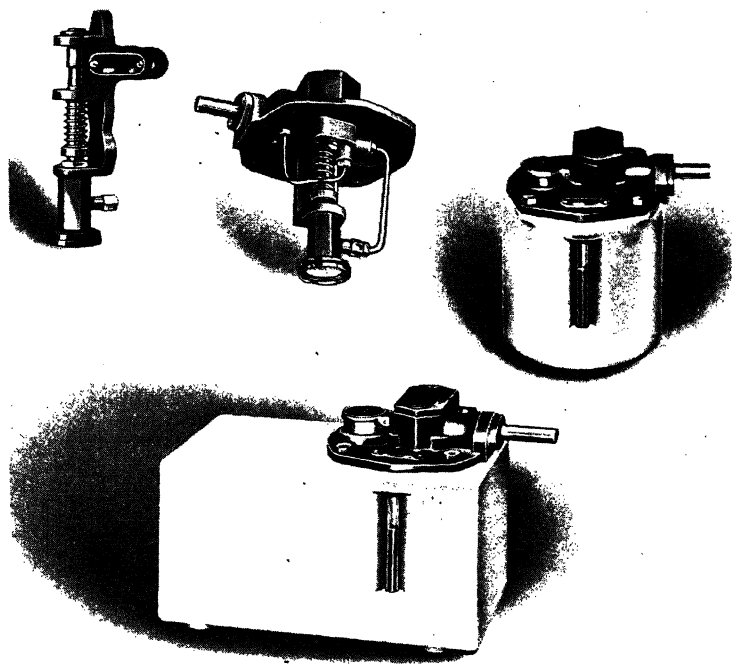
A 2- and 6-pint lubricating pump unit of a continuous centralized system suitable for light machines. (Courtesy Bijur Lubricating Corp.)
